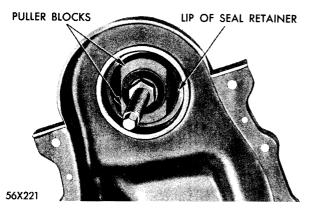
Puller Blocks Expanded to Correct Pulling Position
